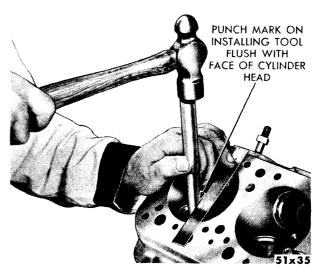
Installing Intake Valve Guide (Tool C-3150)
